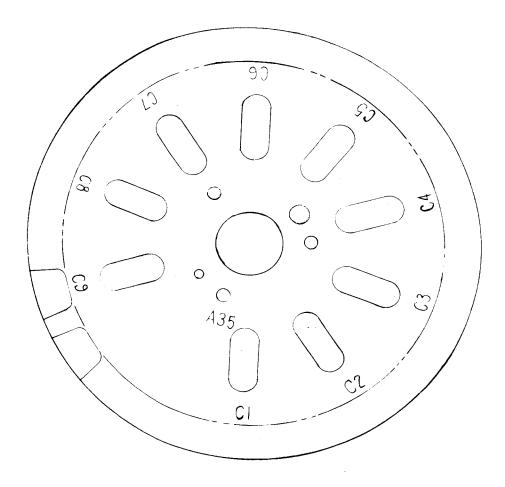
10 kHz Rotor Subassembly A2A4A35, Component Locations
